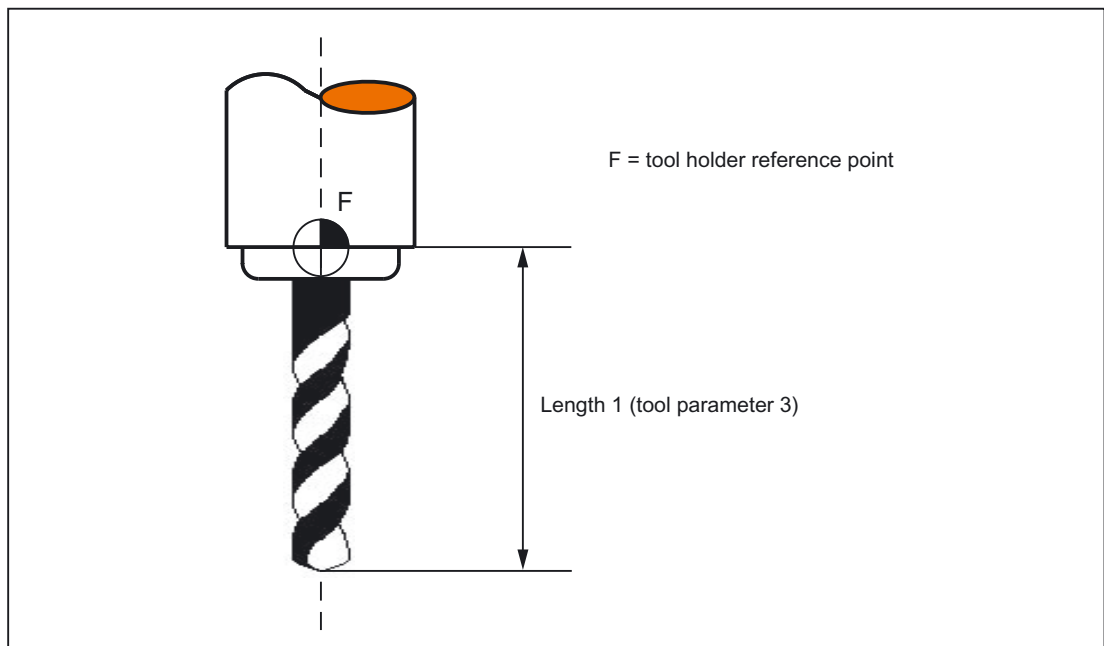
Twist drill (tool type 200) with tool length (tool parameter 3)
